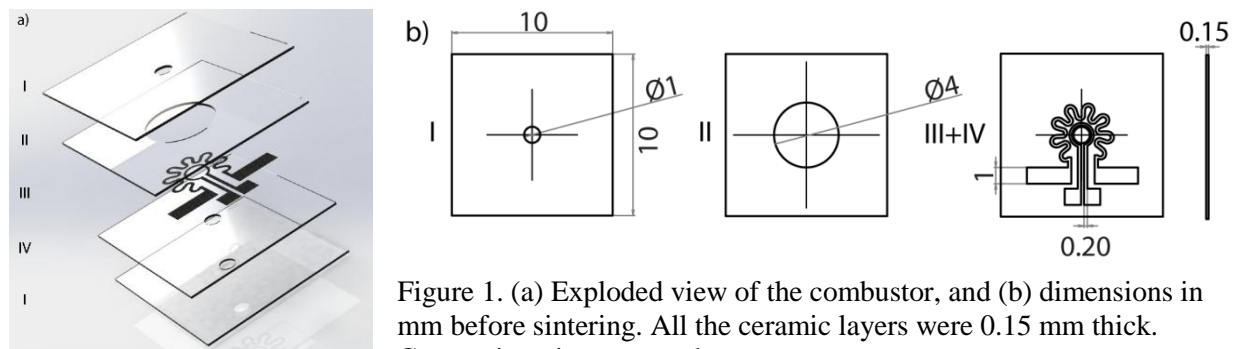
(a) Exploded view of the combustor, and (b) dimensions in mm before sintering. All the ceramic layers were 0.15 mm thick. Connection vias are not shown.
